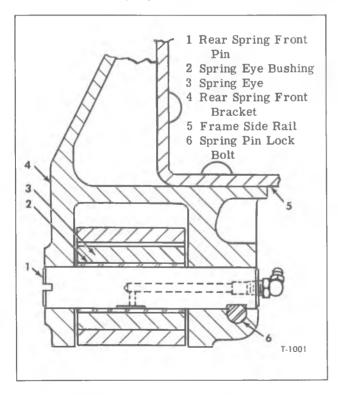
Section Through Spring Eye and Front Bracket (Typical)
